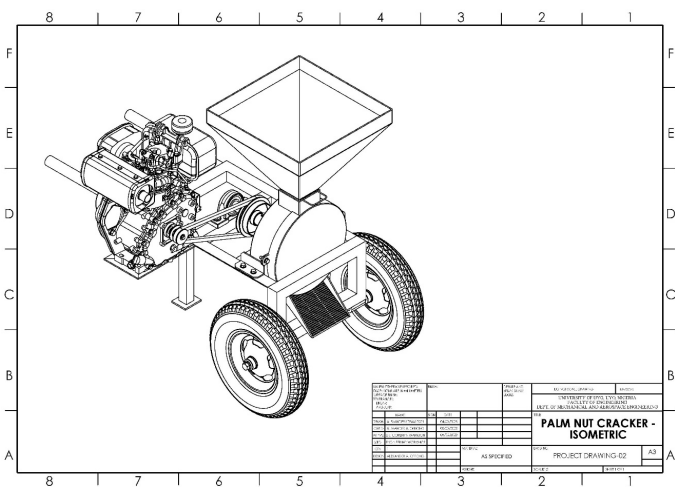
Isometric drawing the palm kernel nut cracking machine
